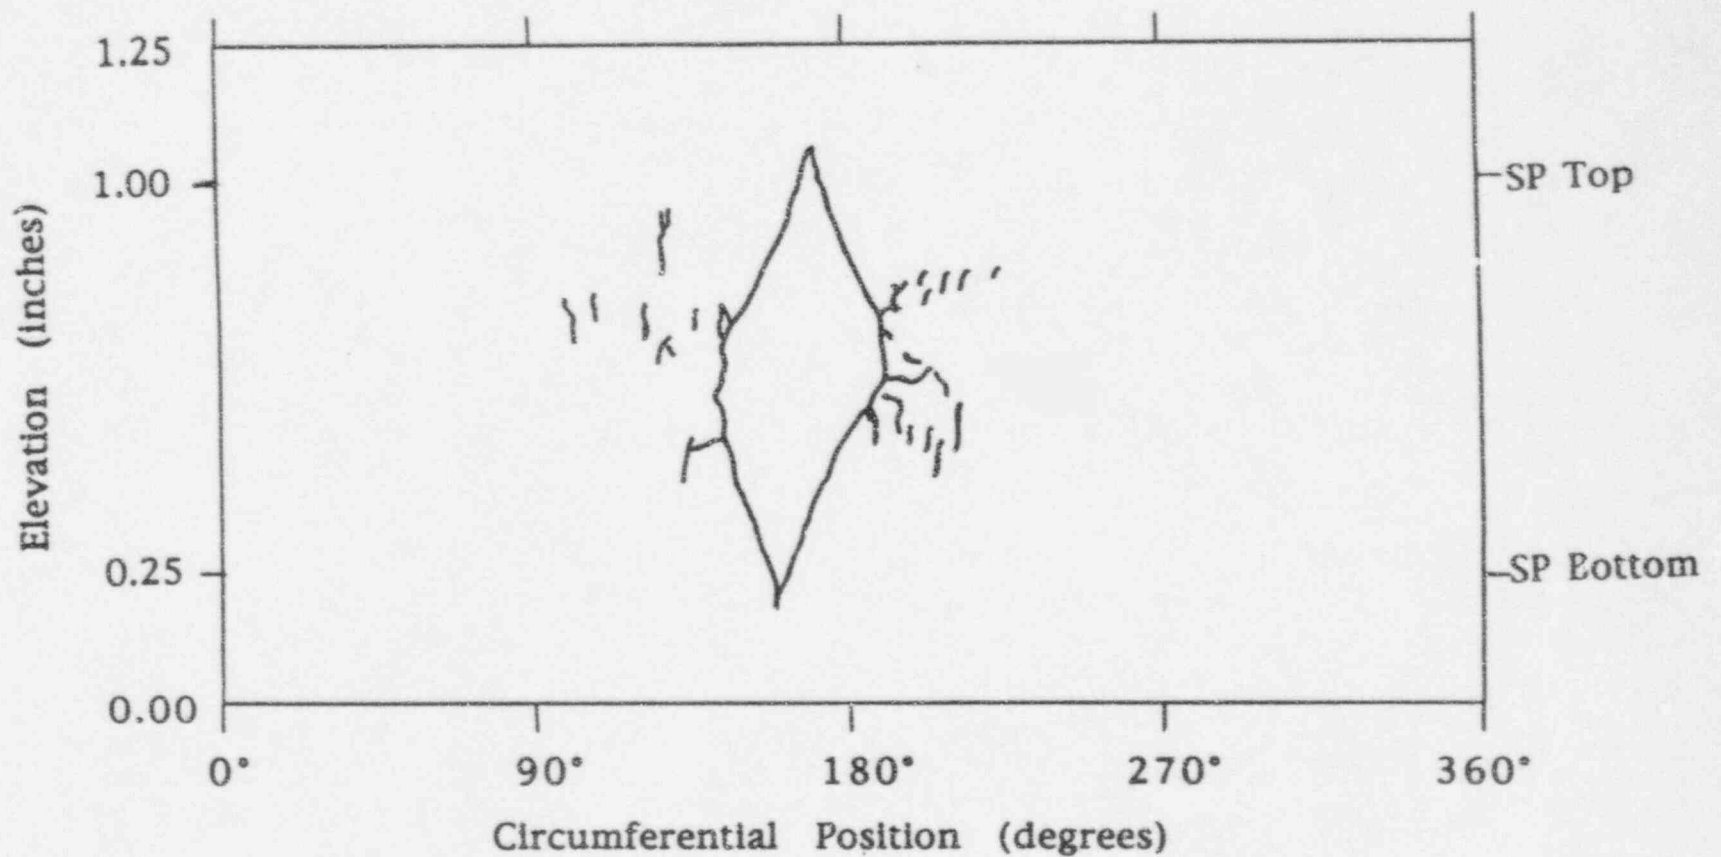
Sketch of the OD surface crack distribution found at the third tube support plate (TSP3) region of Tube R20-C102. Also shown is the location of the burst fracture opening. The burst opening extended beyond the TSP crevice region, but the corrosion cracking on the burst fracture was confined to the crevice region.
